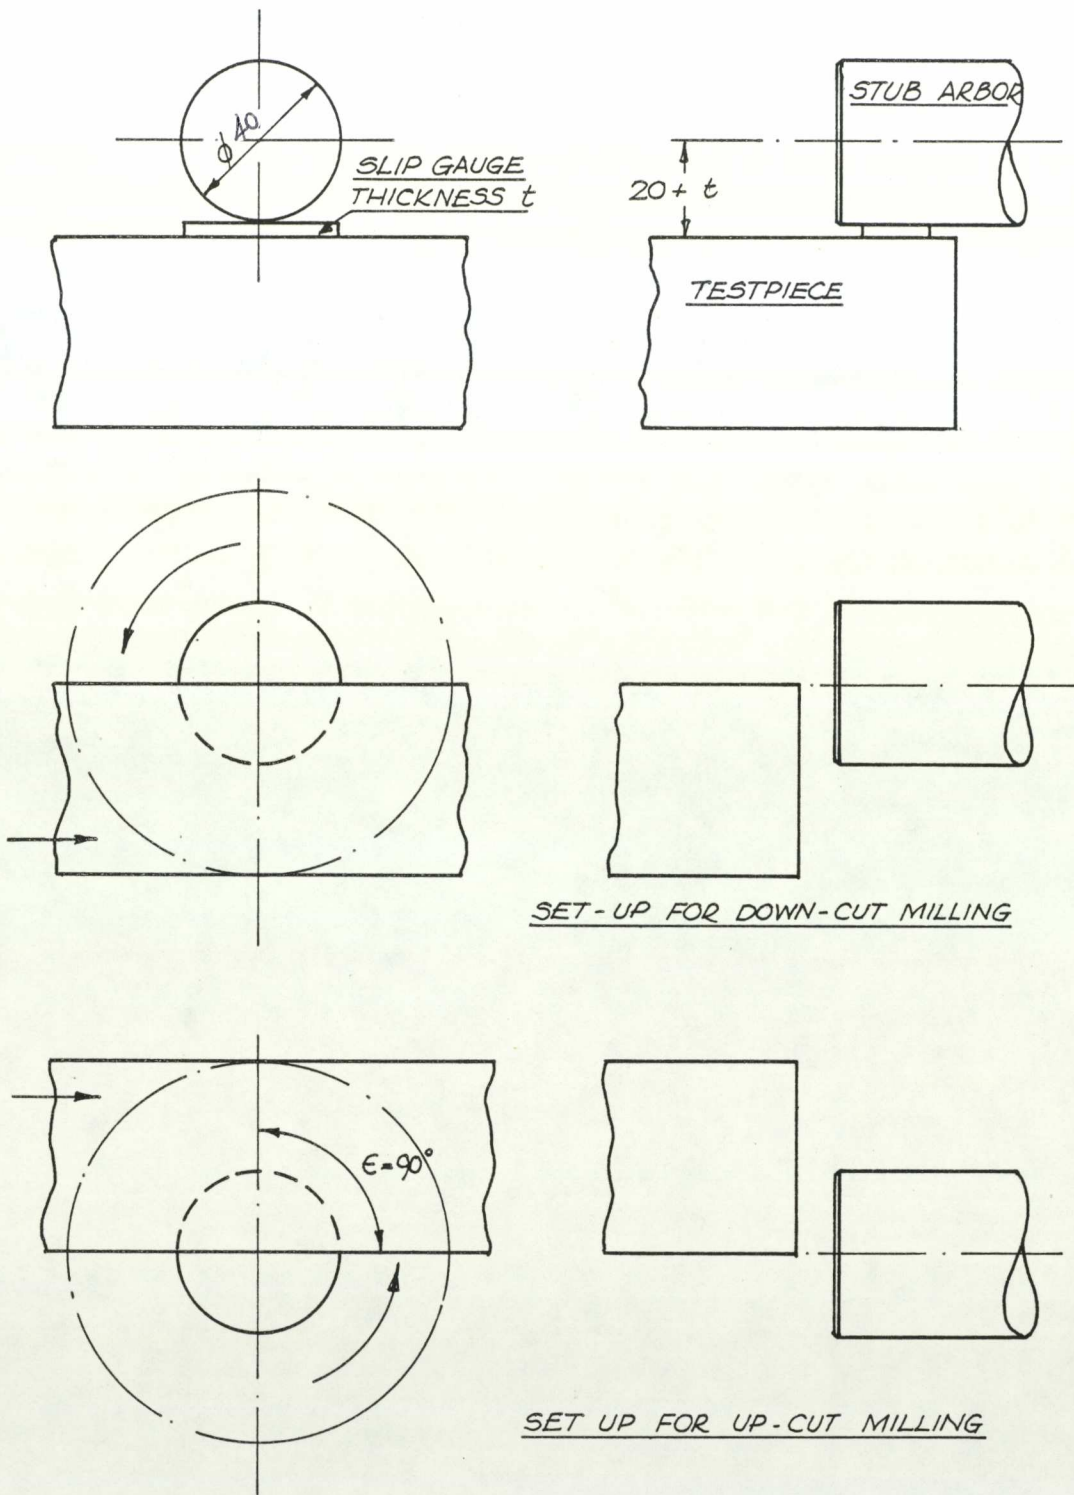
SETTING CUTTER/TESTPIECE RELATIONSHIP
